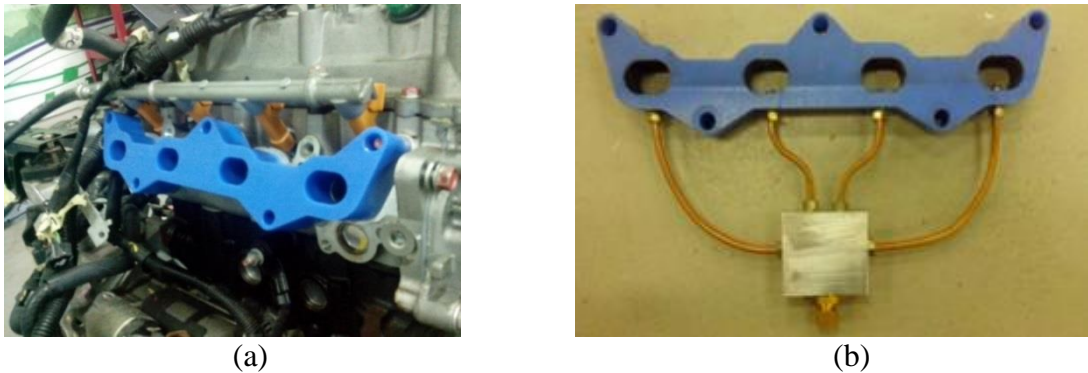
Separator for the EGR (a) positioned before the intake manifold; (b) mounted with the distributor.
